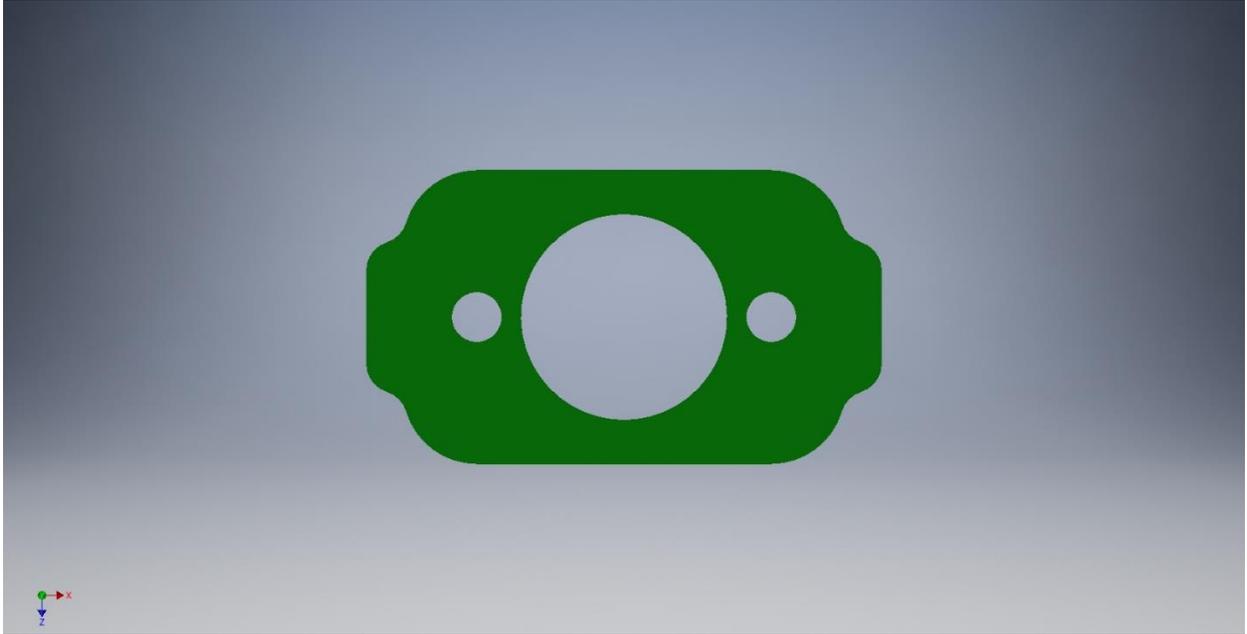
View of Wheel Lock Attachment for the Drive Shaft Bar Lock
